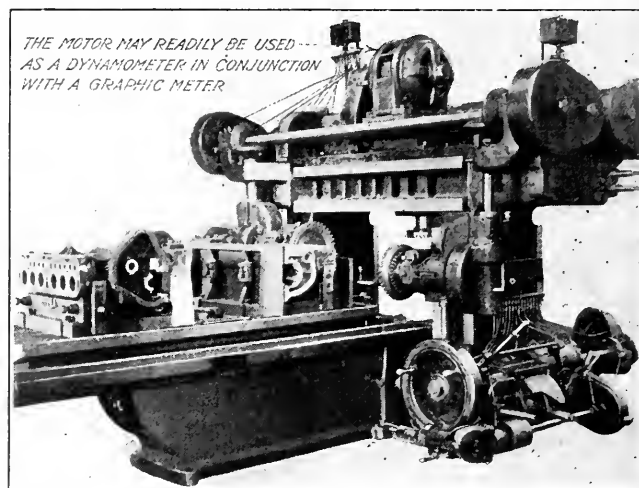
THE MOTOR DRIVING THIS MACHINE MAY BE USED AS A DYNAMOMETER WITH A GRAPHIC METER
